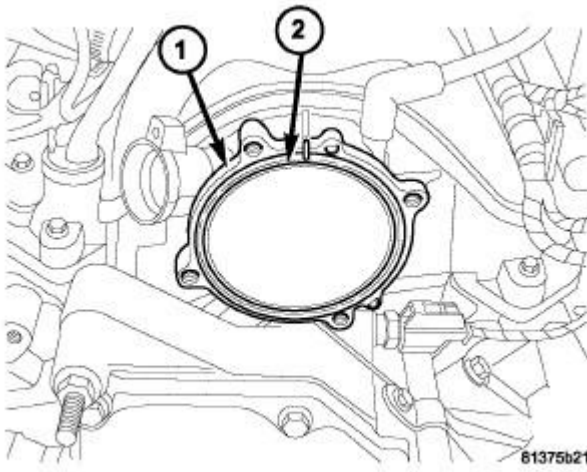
Throttle Body O-Ring At Front Of Intake Manifold
